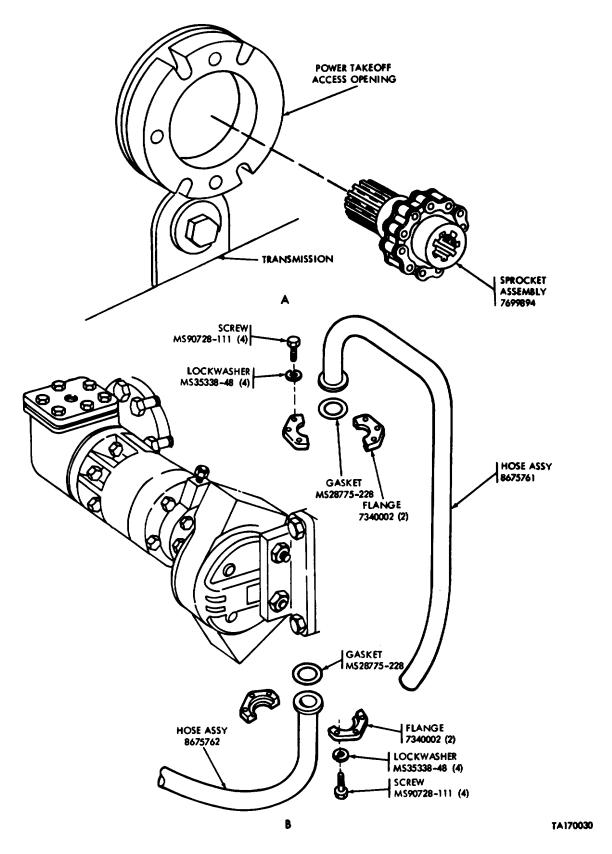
Installation of power takeoff, sprocket assembly, hoses, and bracket (sheet 1 of 2).
